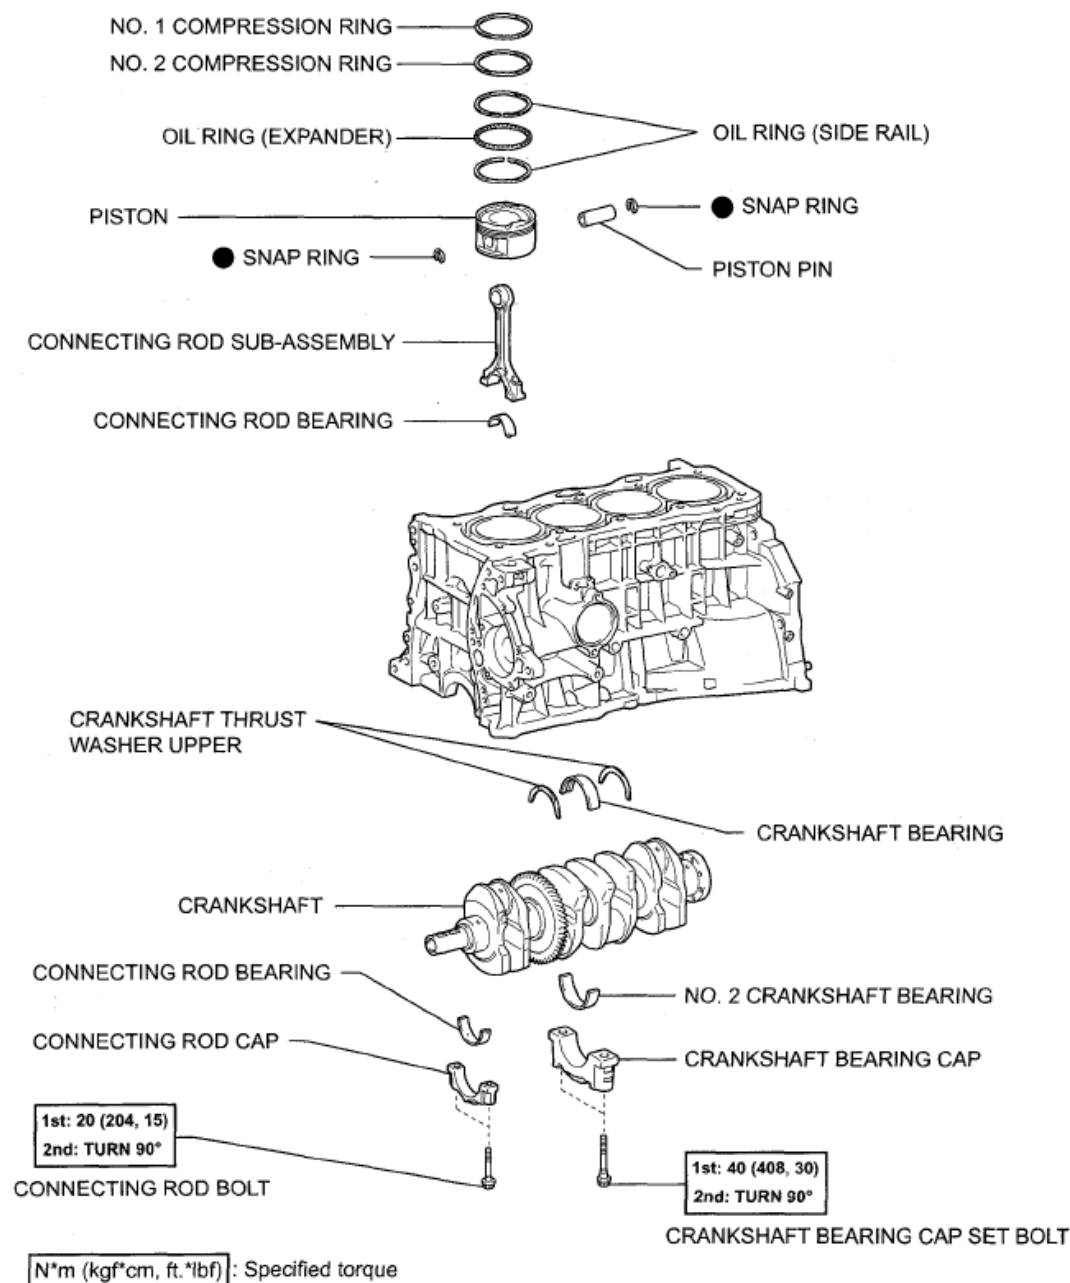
Identifying Engine Unit Replacement Components With Torque Specifications (6 Of 6)
